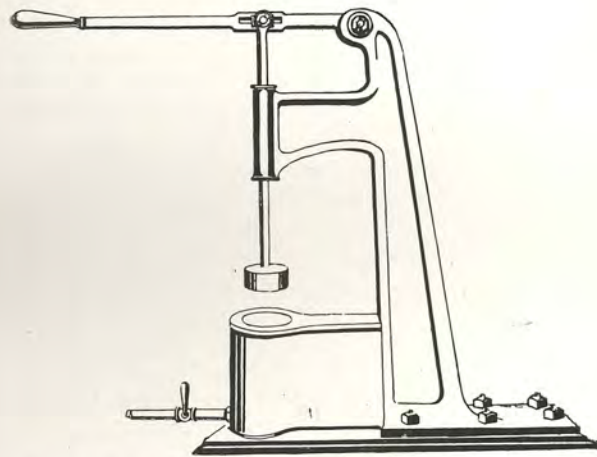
PRESS FOR TURNING ENDS OF CELLULOID BLANKS.
